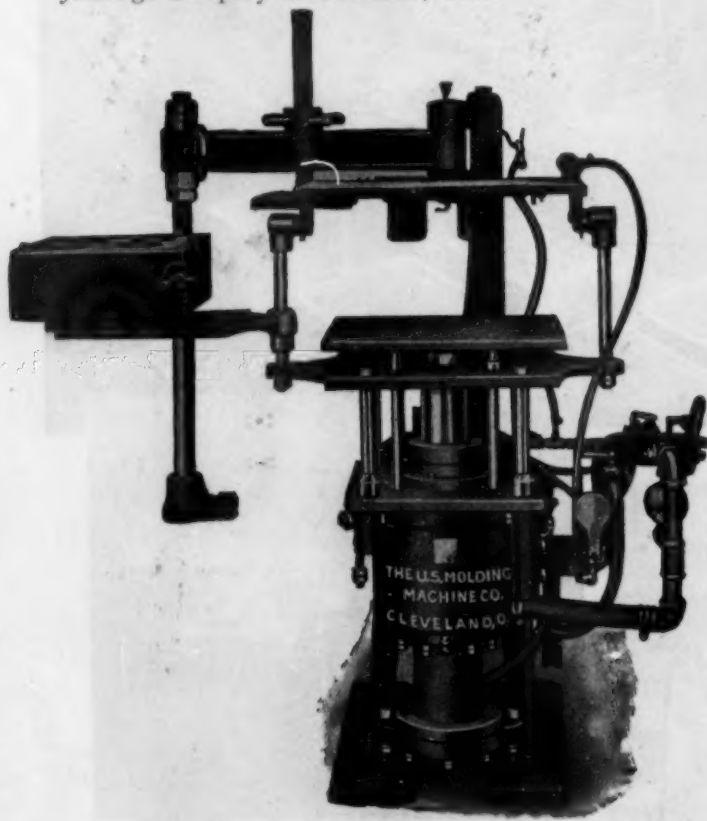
A COMBINATION JAR, SQUEEZE, ROLL-OVER PATTERN-DRAWING MACHINE, THE U. S. LINE MADE BY THE JOHNSTON & JENNINGS COMPANY
